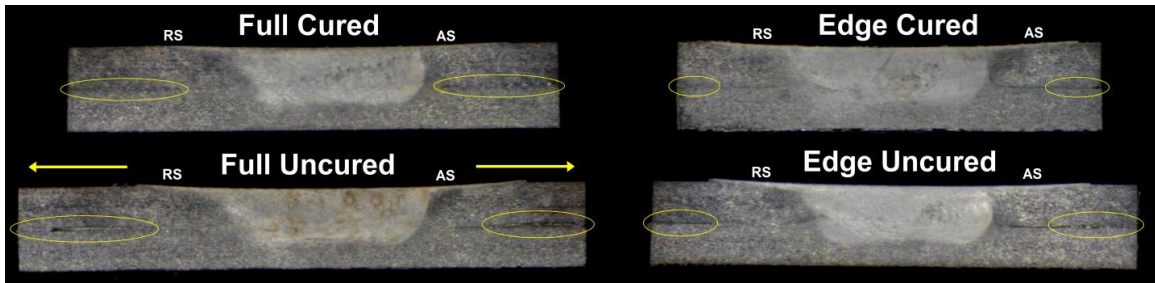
Macrographs of Welded Samples (Sealant Circled)
